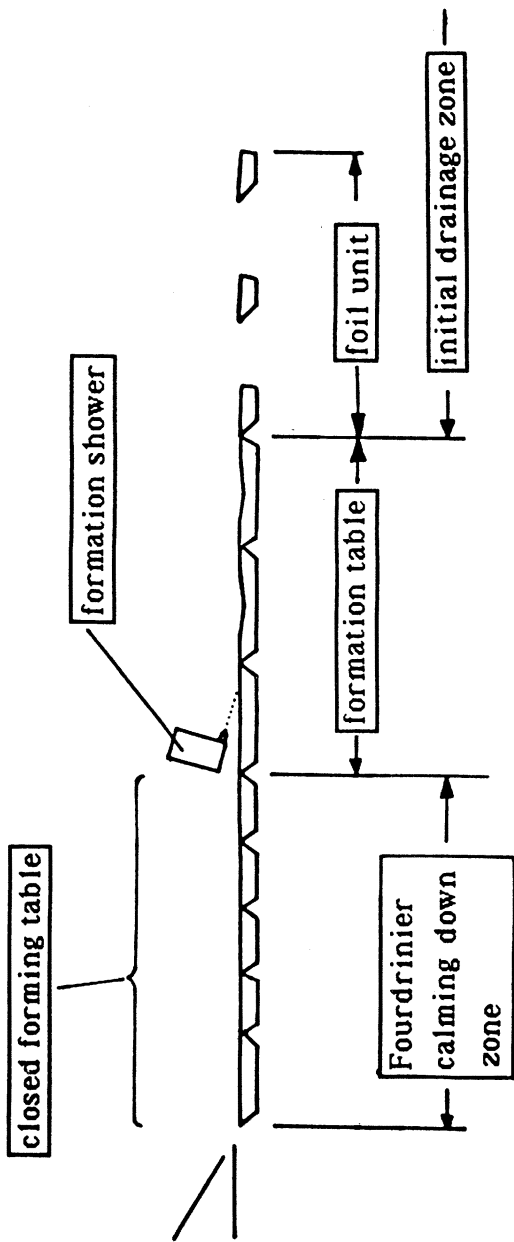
Table layout for “Shear Forming” on machine with an unstable headbox discharge.
